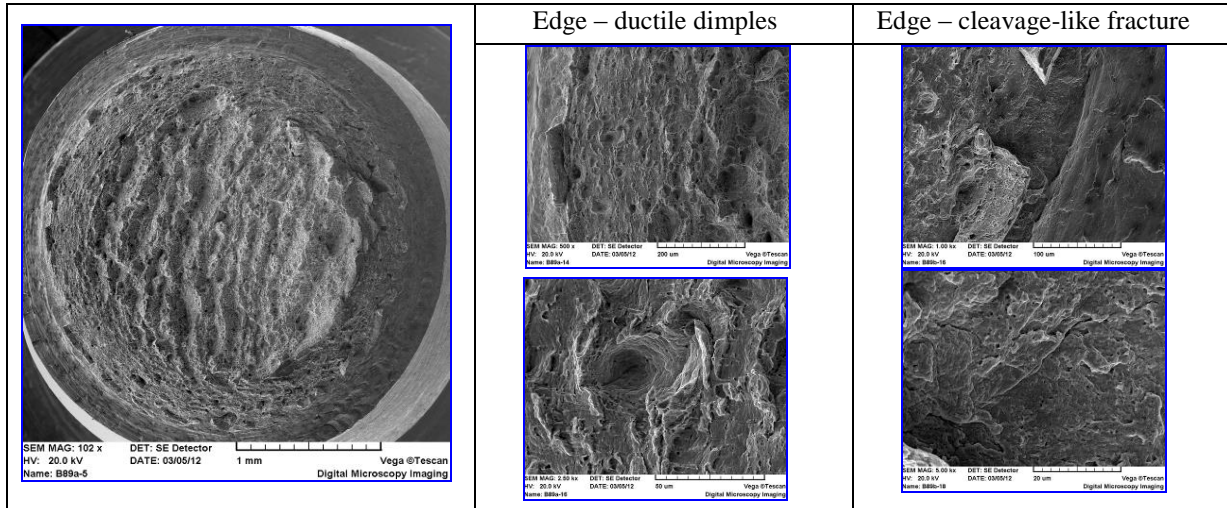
Fracture surfaces of B89 specimen tested at 400°C in lead
